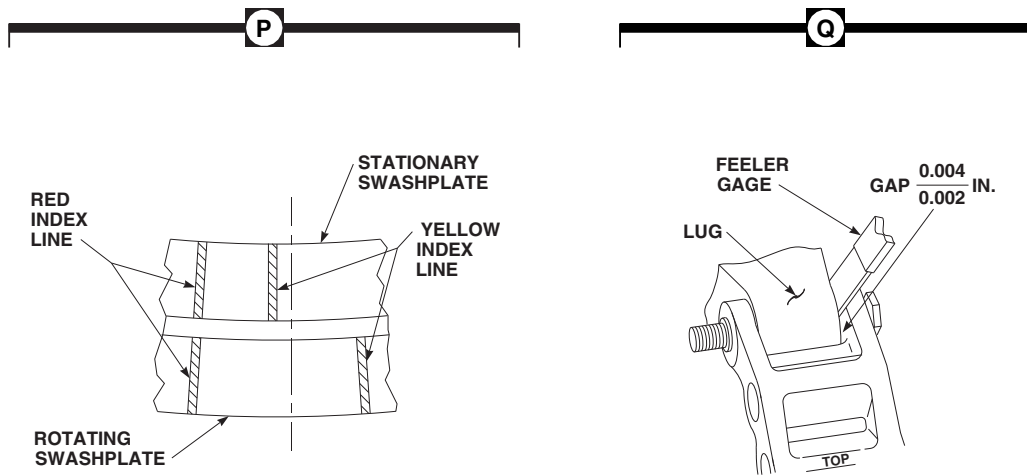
REPLACE MAIN ROTOR HEAD AND SHAFT EXTENSION (SHEET 4 OF 5)
